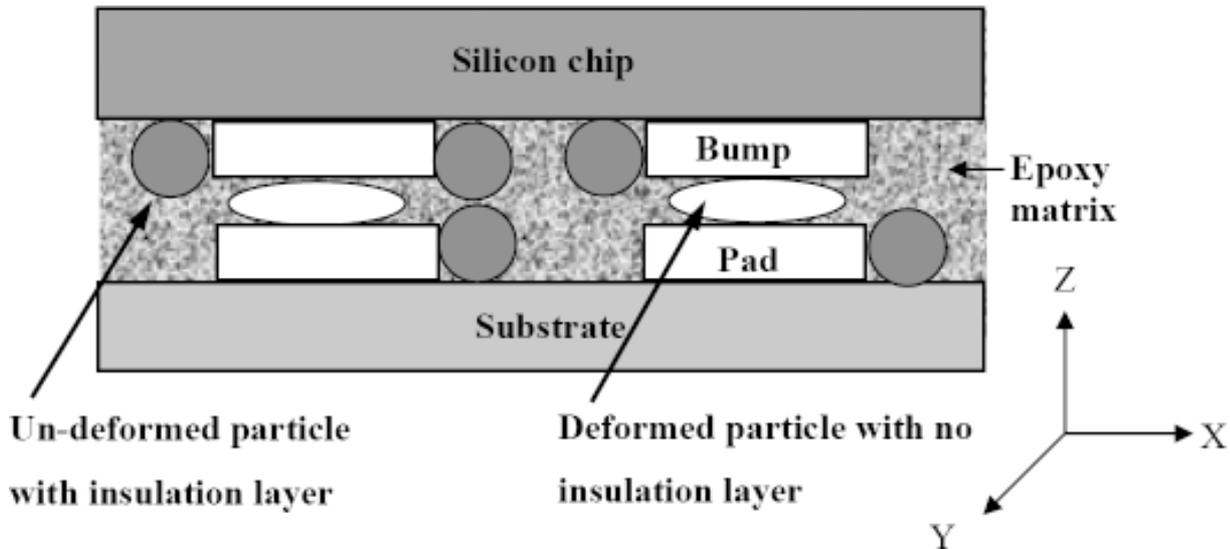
Schematic cross-sectional view of flip chip conductive adhesive joints.
